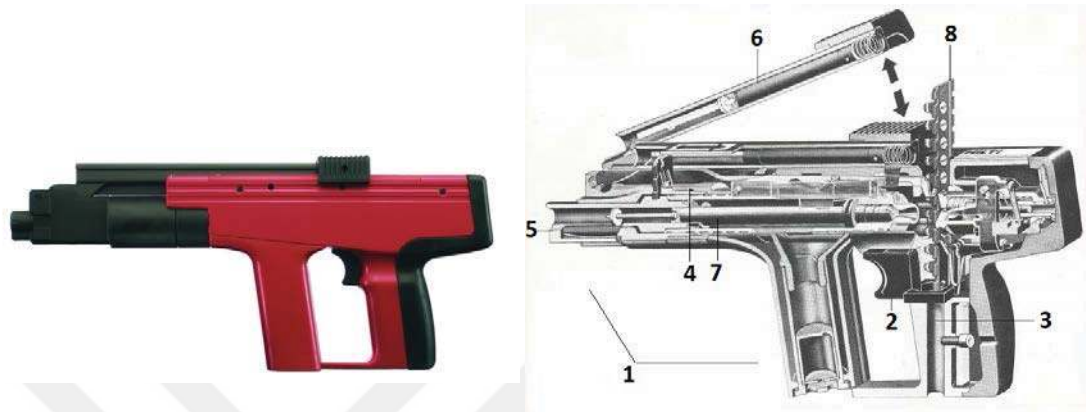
The powder actuated nail gun and illustration of its inner parts [57].
